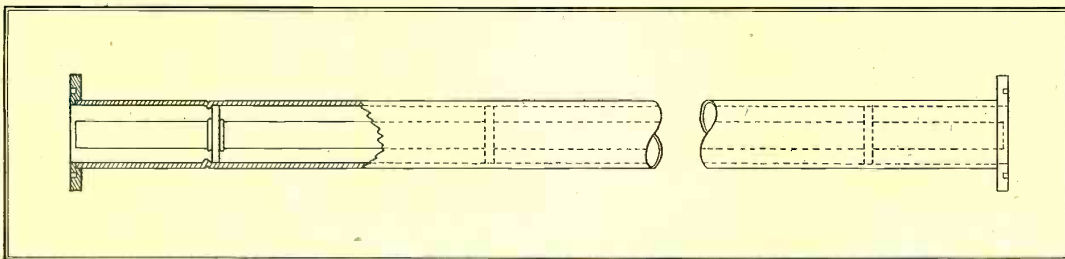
THE ROLLED-IN GROOVE SUPPORTS THE INNER CONDUCTOR ON VERTICAL RUNS OF LINE
